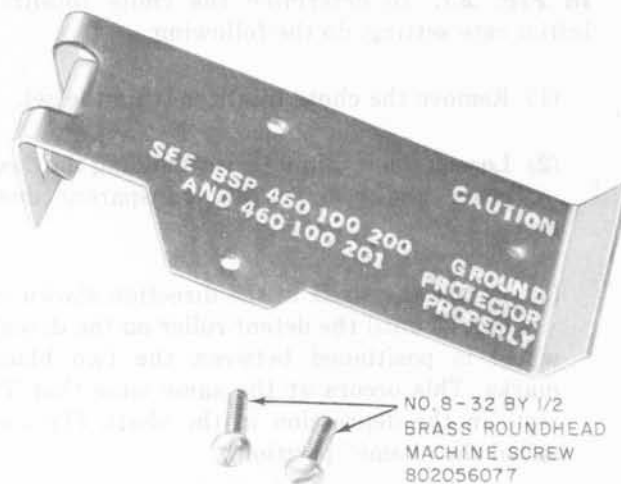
7A Clip for Mounting 123A1A (DA) or 123E1A Protector and 840362024 Capacitor Board Assembly in Panel Set
